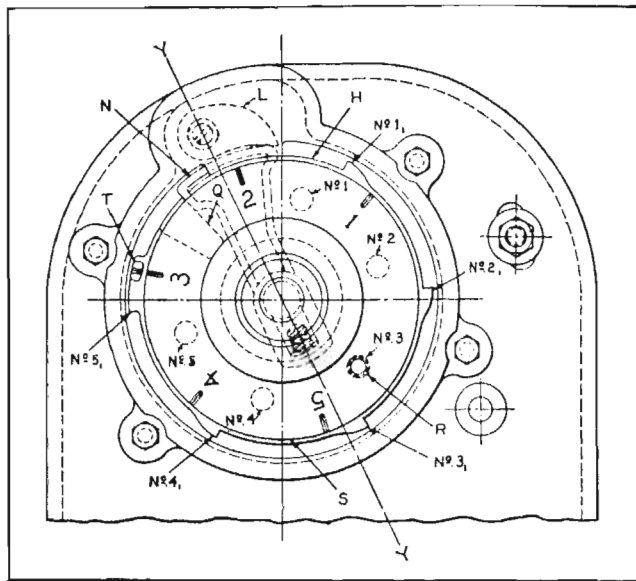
Dial Control End of Mechanism Shown in Fig. 11.
